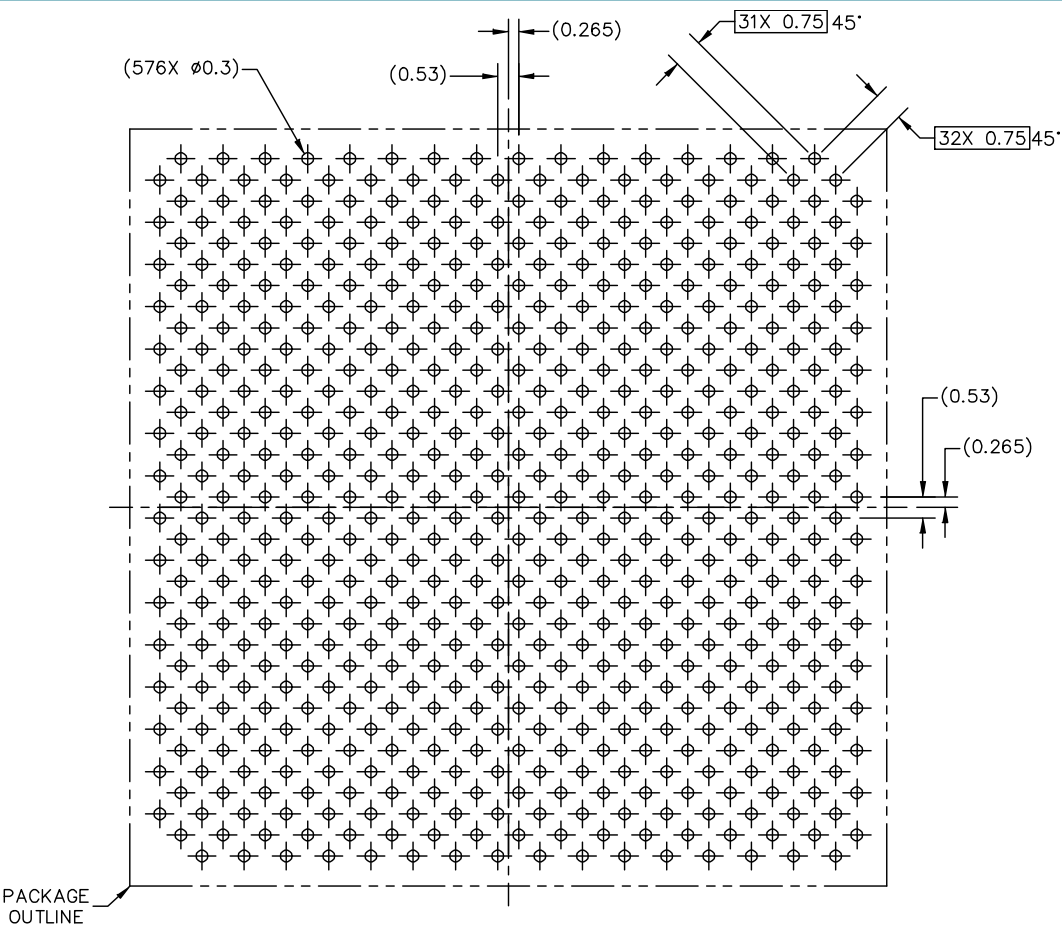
Reflow soldering footprint part2 of FBGA576 (SOT2031-1)
